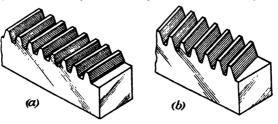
Comparison of Racks for (a) Straight-toothed Spur Gears, (b) Helical Gears
